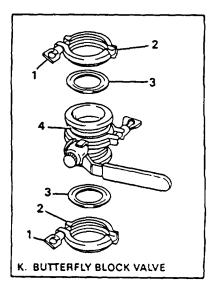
Low Pressure Piping (Sheet 2 of 8) Pipe Sections and Manually Actuated Butterfly Block Valves (MODEL WrA40 ONLY)
